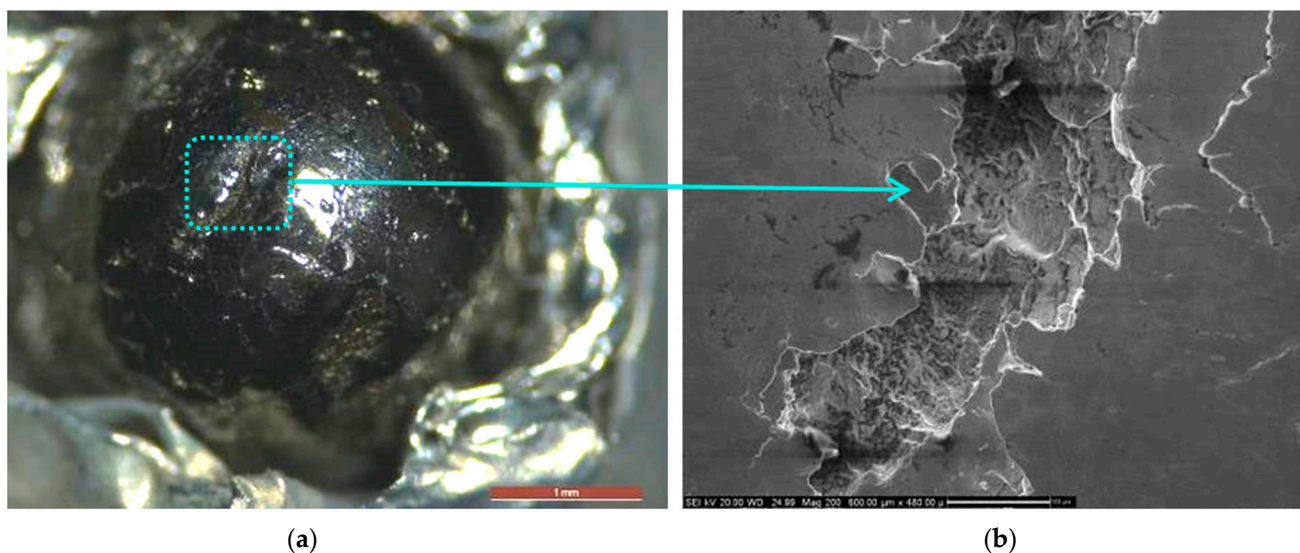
Typical heavy damage appearance of the balls: (a) macroscopic appearance of contact fatigue spalling; (b) fan-shaped morphologies, lamellar damage and cracks.
